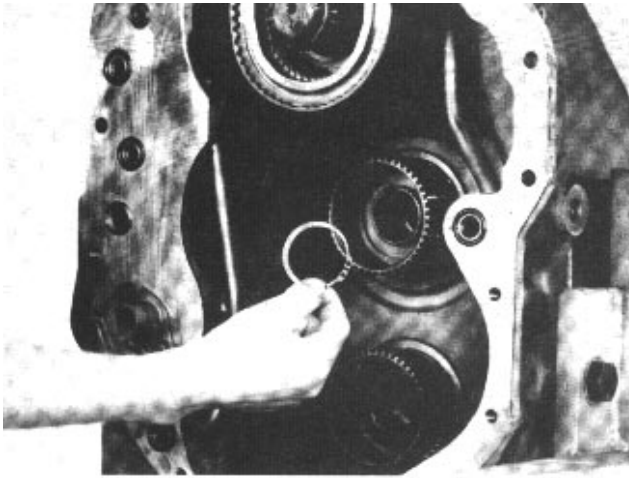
DISASSEMBLY OF THE TRANSMISSION (Sheet 1 of 25)
